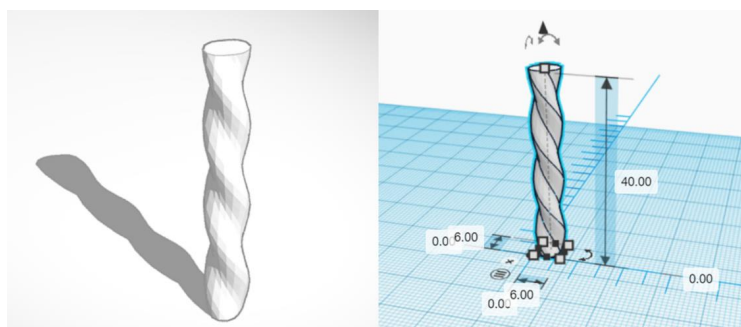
1 Spiral design of the catalyst and its dimensions expressed in millimetres
